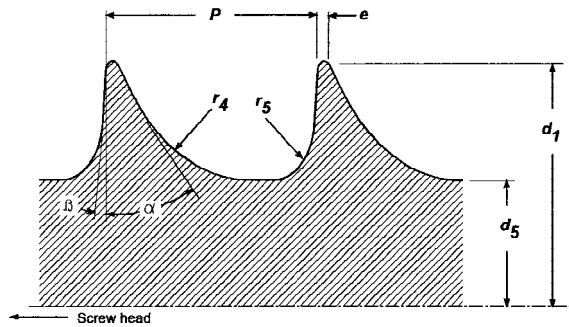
Schematic of HB Screw Thread Dimensions (Table A4.4)
